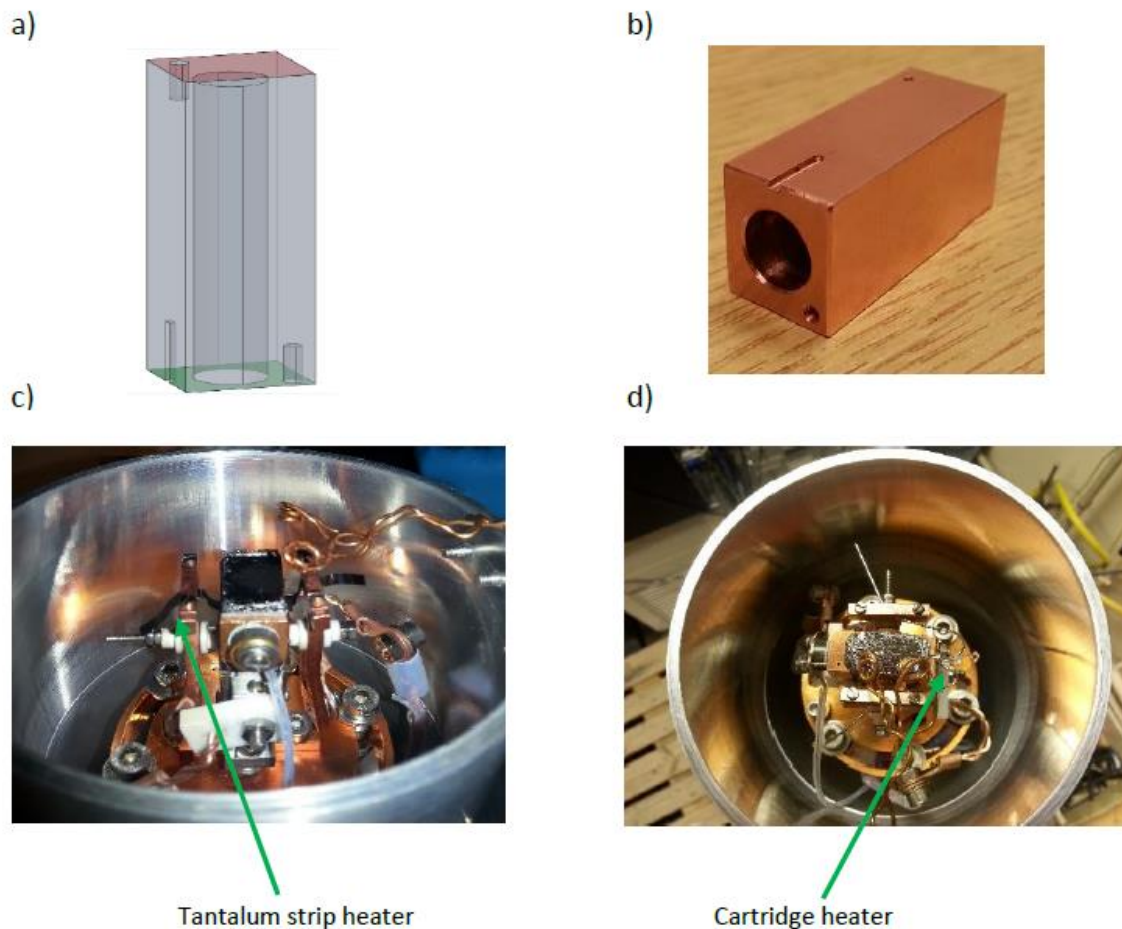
a) The AutoCAD design for the new heating block, b) image of the completed copper heater mount for the cartridge heater, c) old heating block set up with tantalum strip heater highlighted, d) new heating block set up, with the cartridge heater
